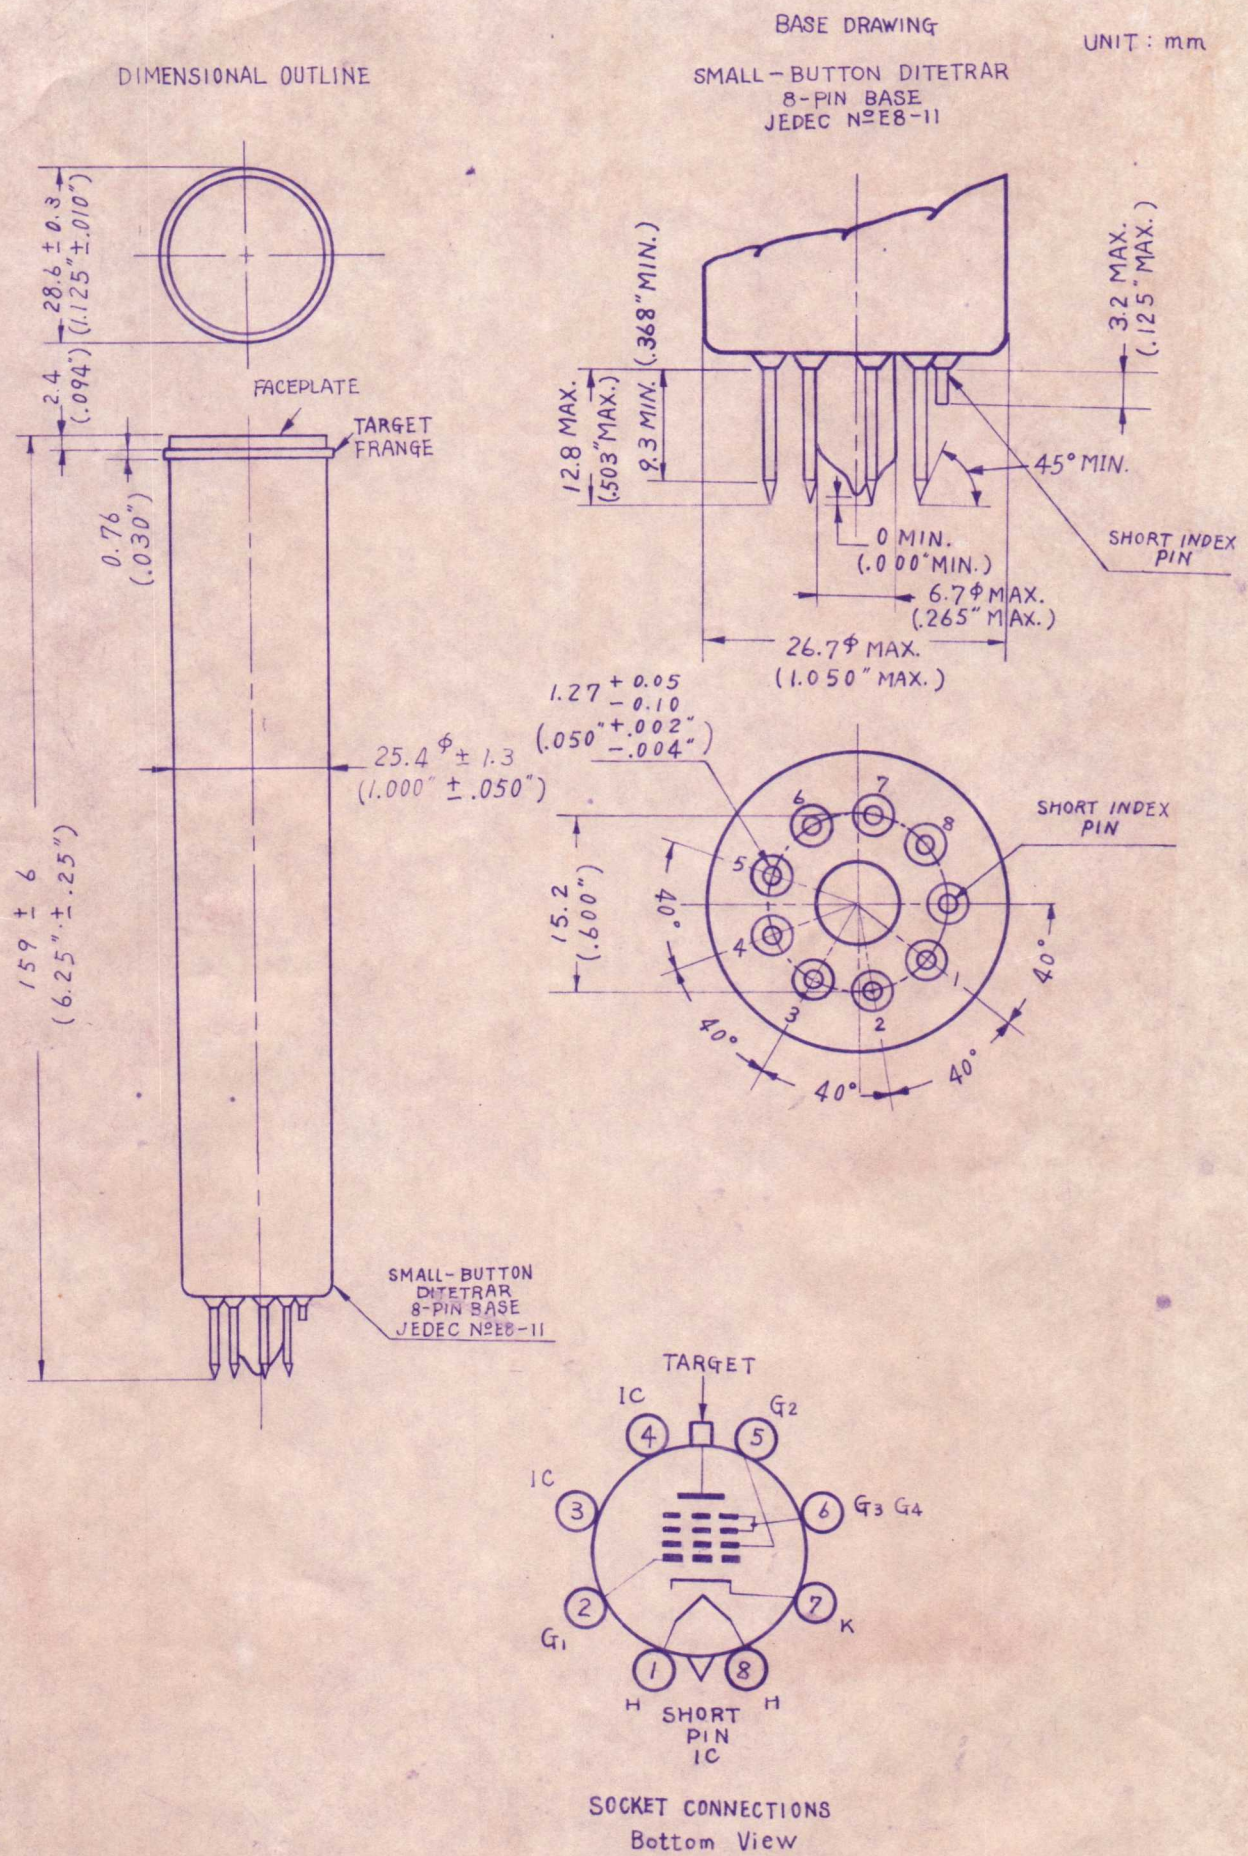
Dimensional Outline, Base Drawing and Socket Connections of Type N156
